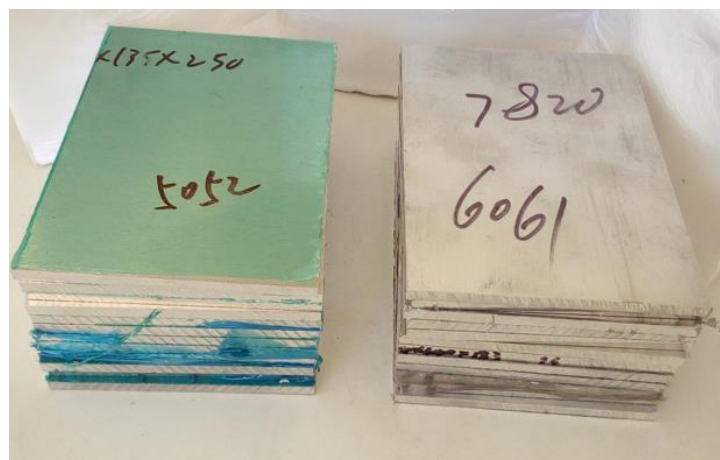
2: Specimen of AA5052-H32 and AA6061-T6 aluminum plates
